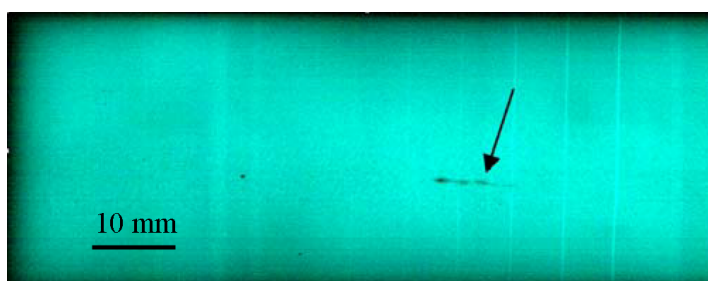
Radiographic picture of the welded joint with linear defect.
